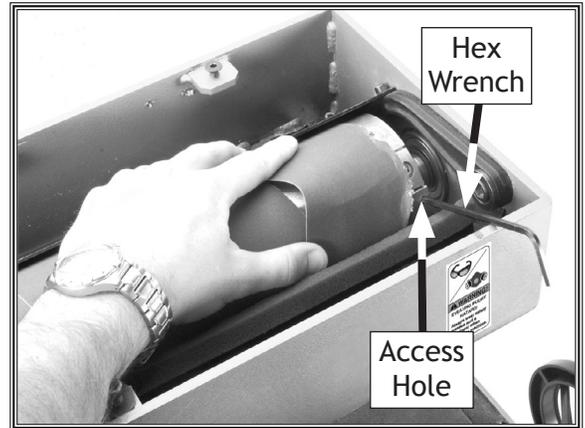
Hex wrench inserted into access hole on right tension wheel.
